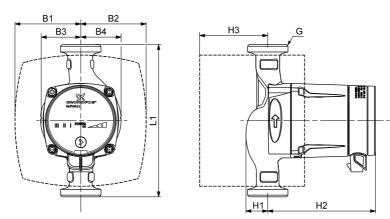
Dimensional sketches, ALPHA2 L XX-40, XX-50, XX-60
